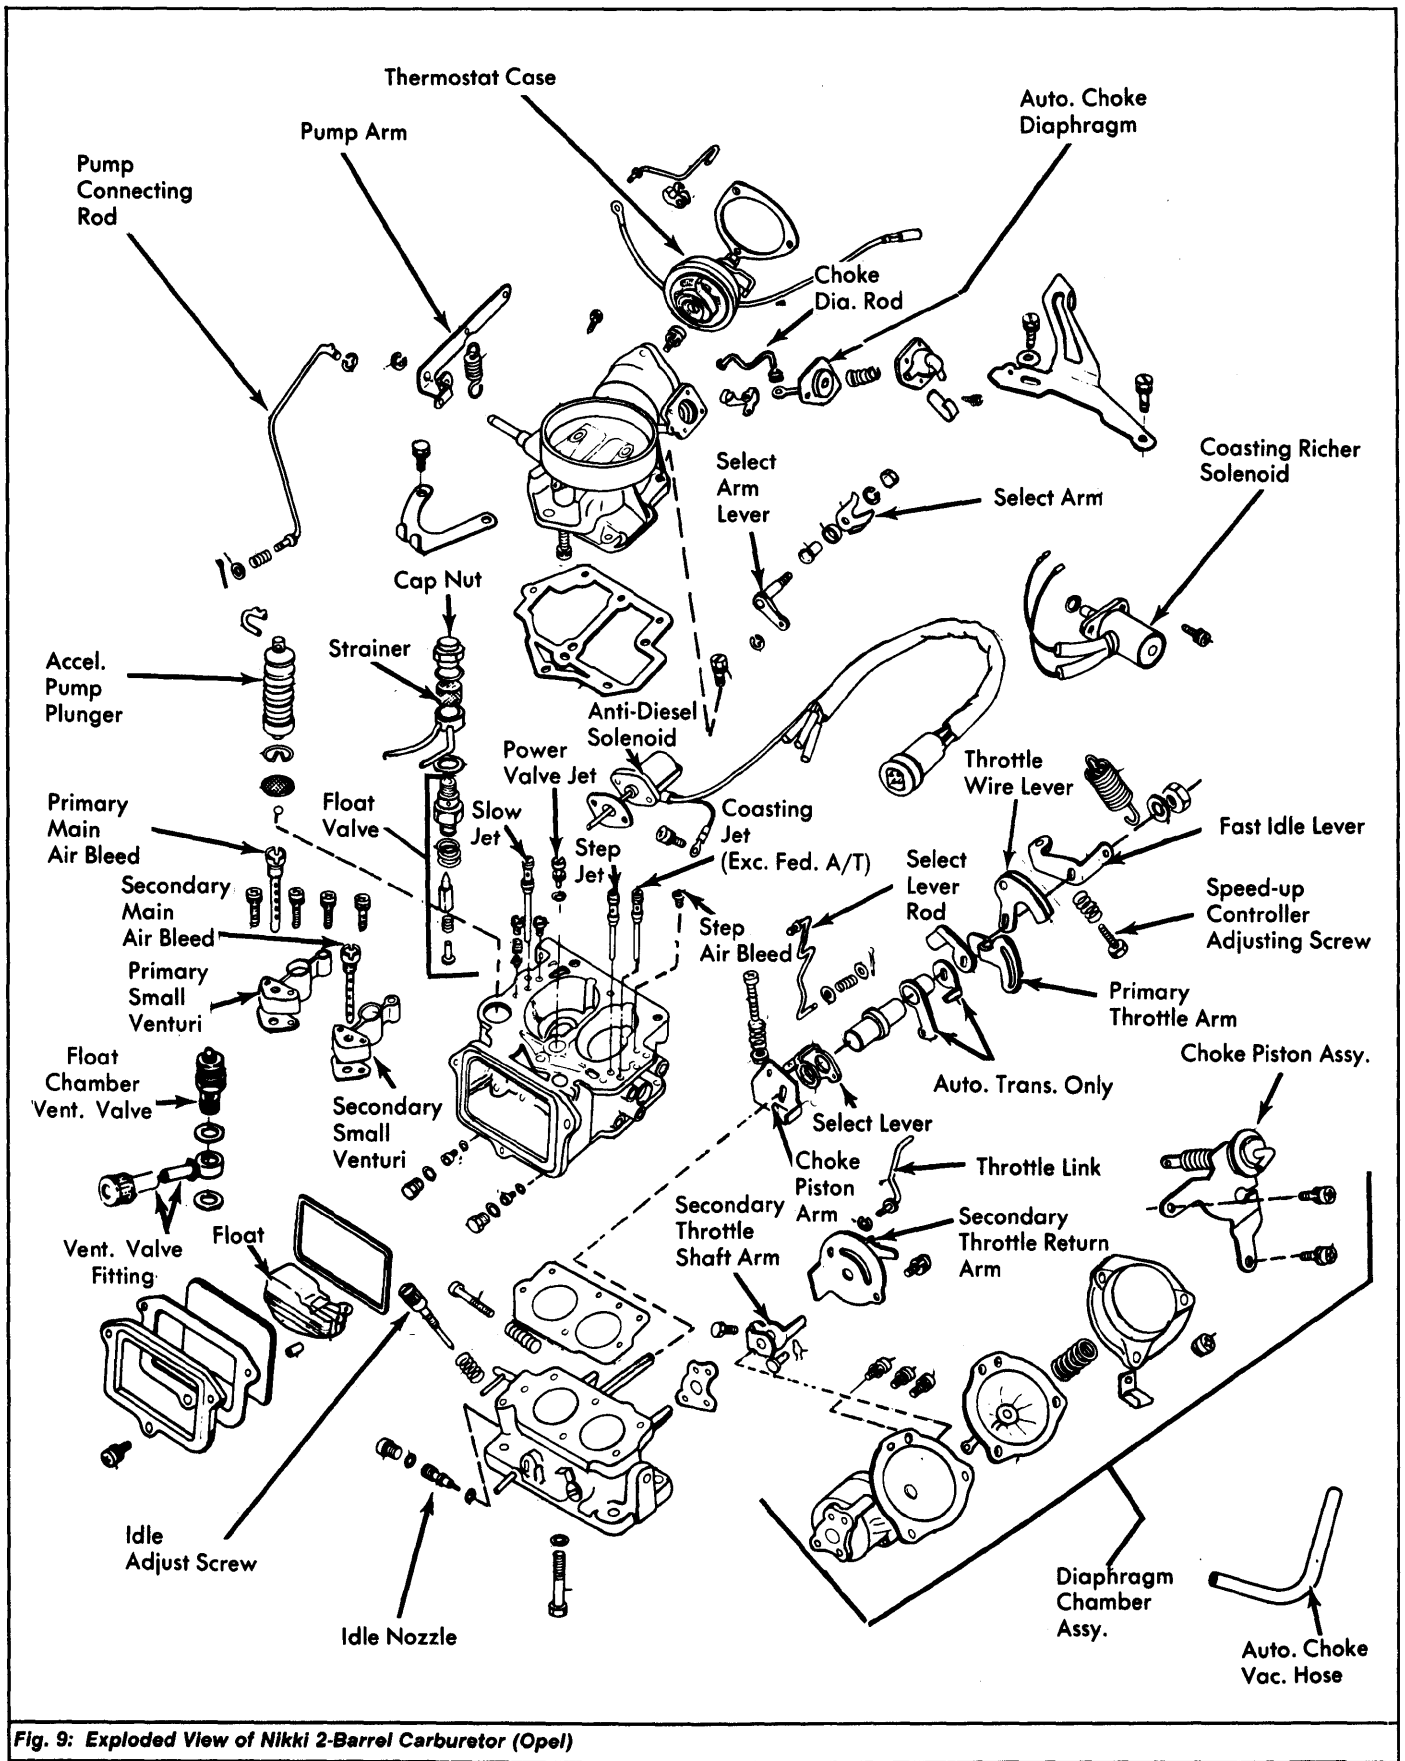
Exploded View of Nikki 2-Barrel Carburetor (Opel)
